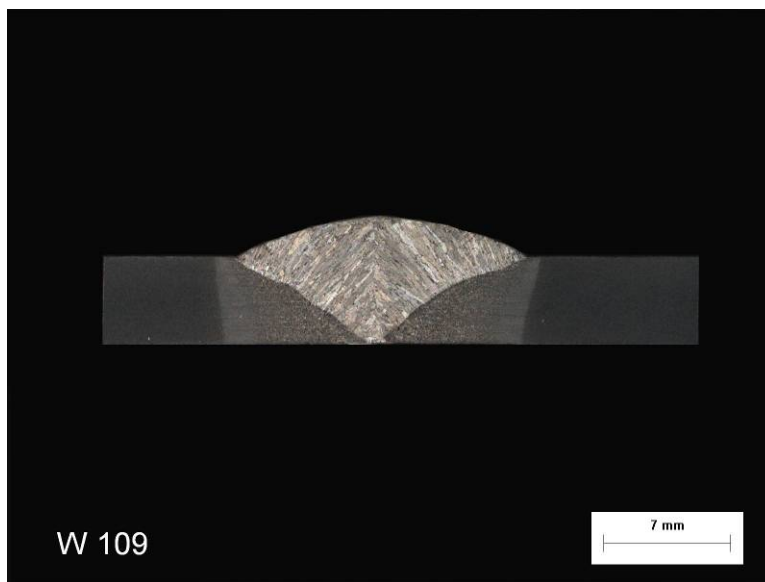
Weld with 1.4-mm Root Opening on 5-mm Plate
